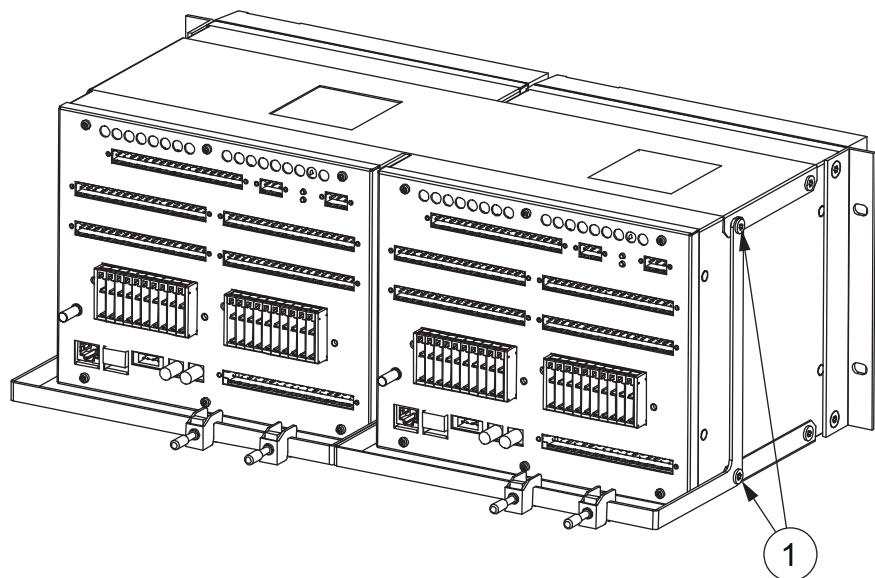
Two rack mounted IEDs with cable shield rails side by side
